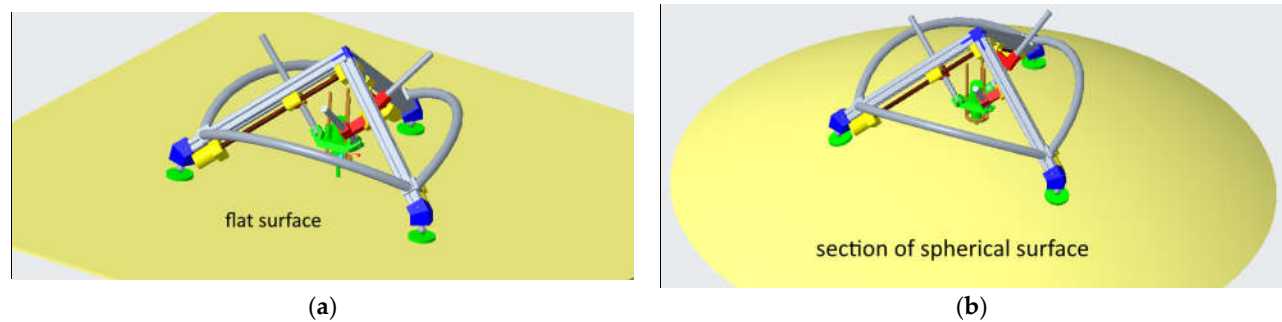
The three-axis robot is attached to (a) a flat surface and (b) a section of a spherical surface.
